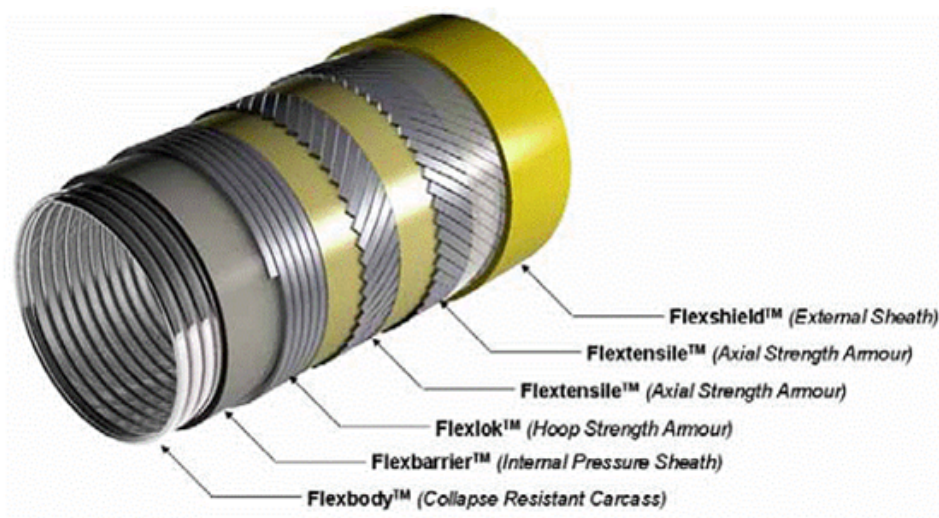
Typical flexible pipe internal structure (Source: GE Oil and Gas).
